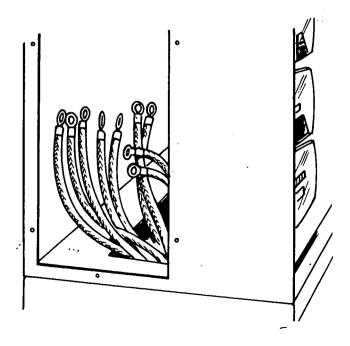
CONTROL BOX (SIDE PANEL REMOVED)
